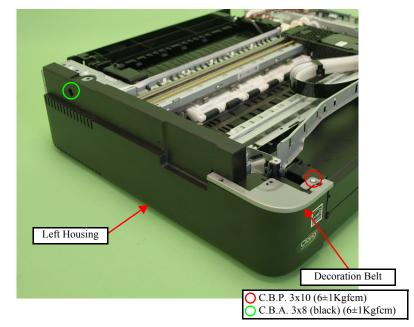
Removing the Left Housing / Decoration Belt L (1)
